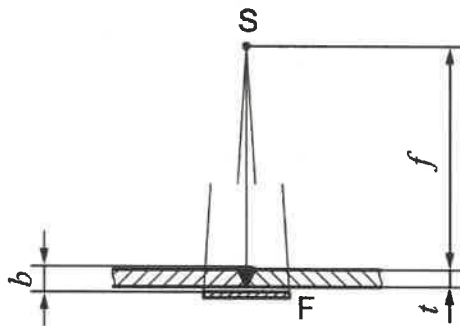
; Plane welds and single wall penetration / Bild 1, ebene Schweißnähte und einwandige Durchstrahlung
